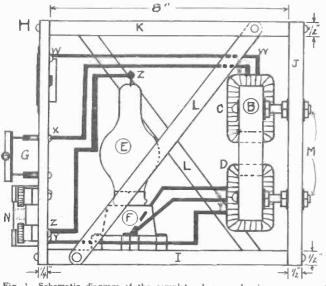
Schematic diagram of the complete charger, showing arrangement of parts on front and back panels. The heavy black lines designate the wiring.
